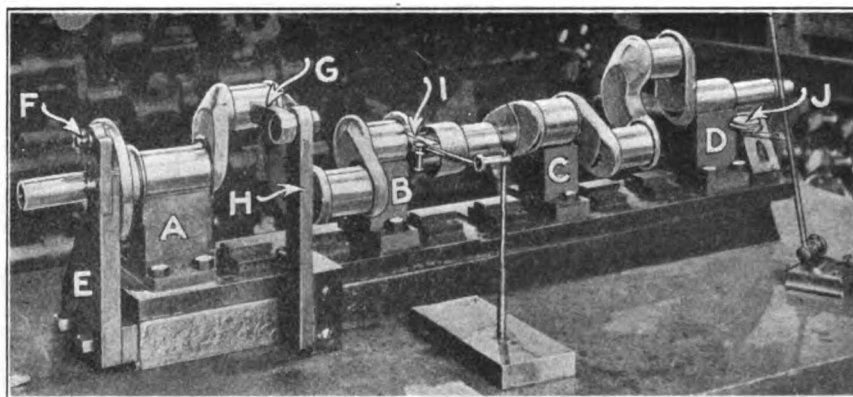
INSPECTING STUDEBAKER CRANKSHAFT
